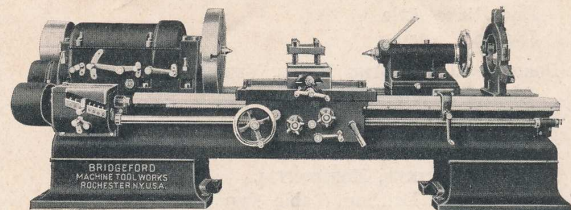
BETTS-BRIDGEFORD HEAVY DUTY GEARED HEAD SCREW CUTTING LATHE, TYPE A1100
